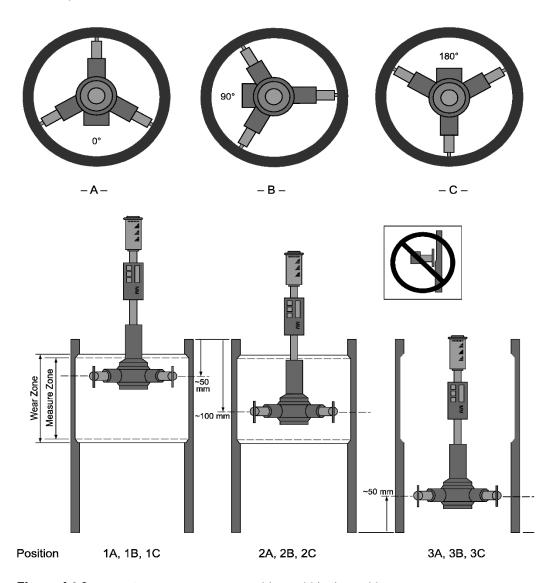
Bore Gauge Measurement Positions within the Mold Bore
